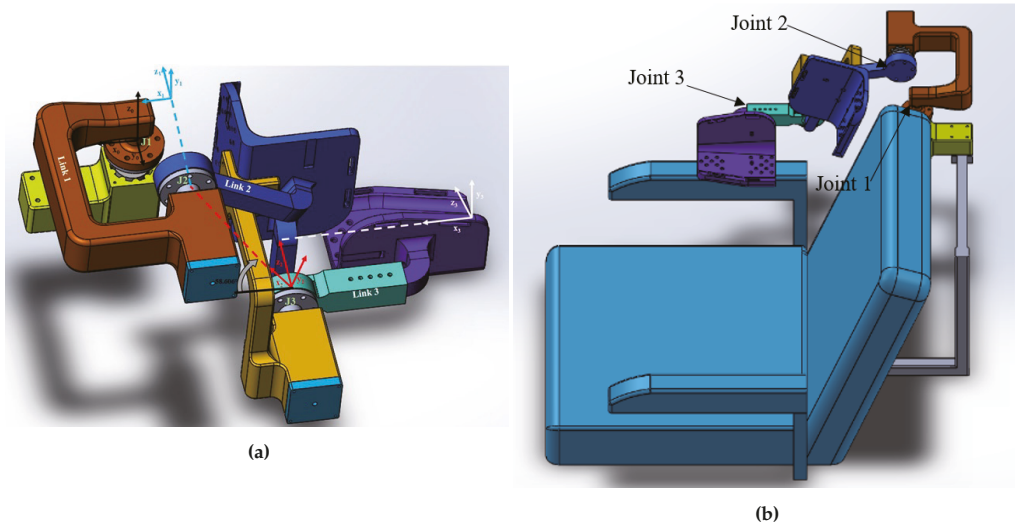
(a) Assembly of the exoskeleton, (b) assembly of the exoskeleton mounted on the wheelchair.
